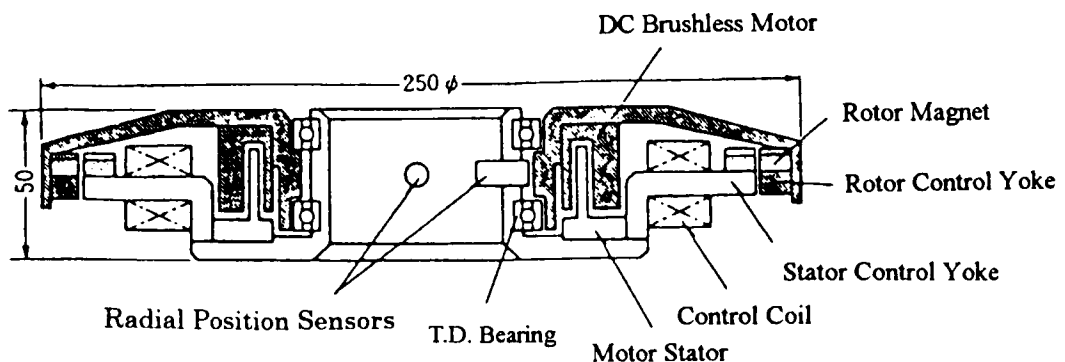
Flat-shaped Magnetic Bearing Reaction Wheel
